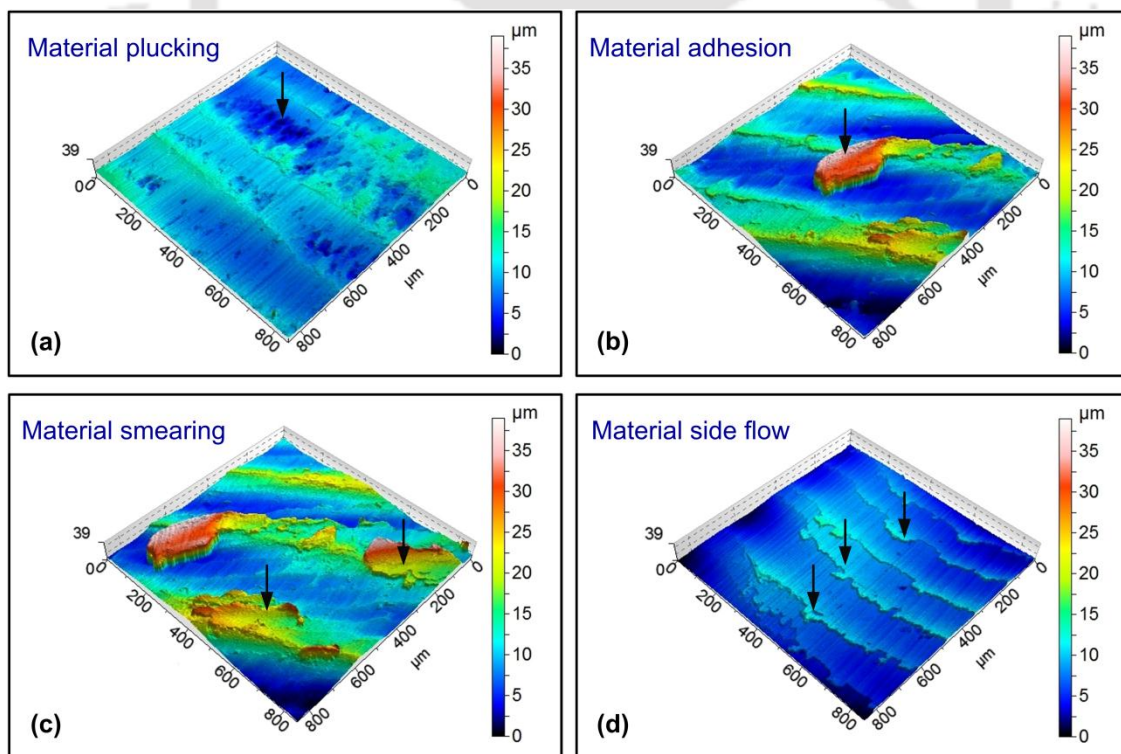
Surface defects: (a) Material plucking, (b) Material adhesion, (c) Material smearing, (d) Material side flow
